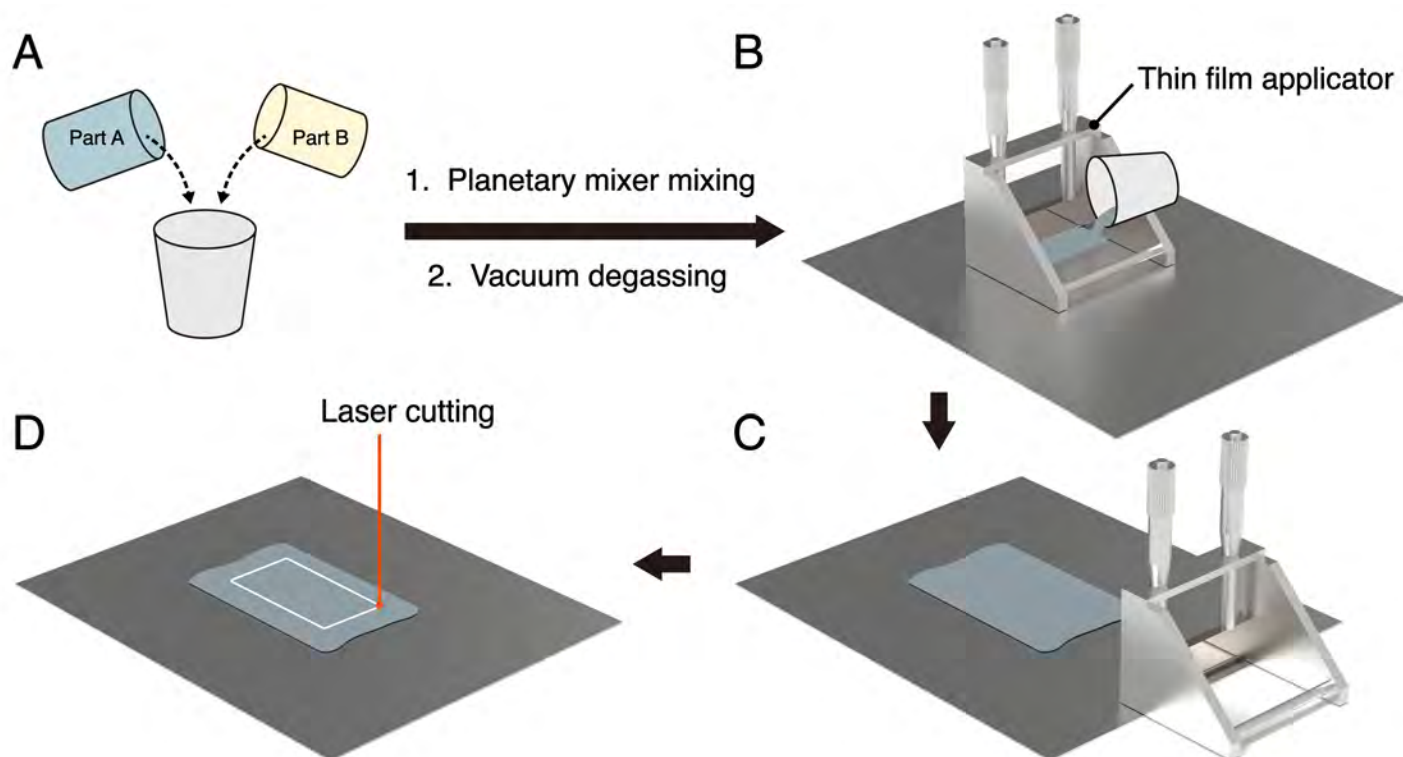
Membrane fabrication process. (A) Mixing Part A and Part B of silicone elastomer. (B) Pouring the elastomer onto an aluminum sheet and (C) adopting the thin film applicator to fabricate a thin layer of elastomer. (D) Cutting the membrane into the desired size using CO_2 laser for further prestretch process.
